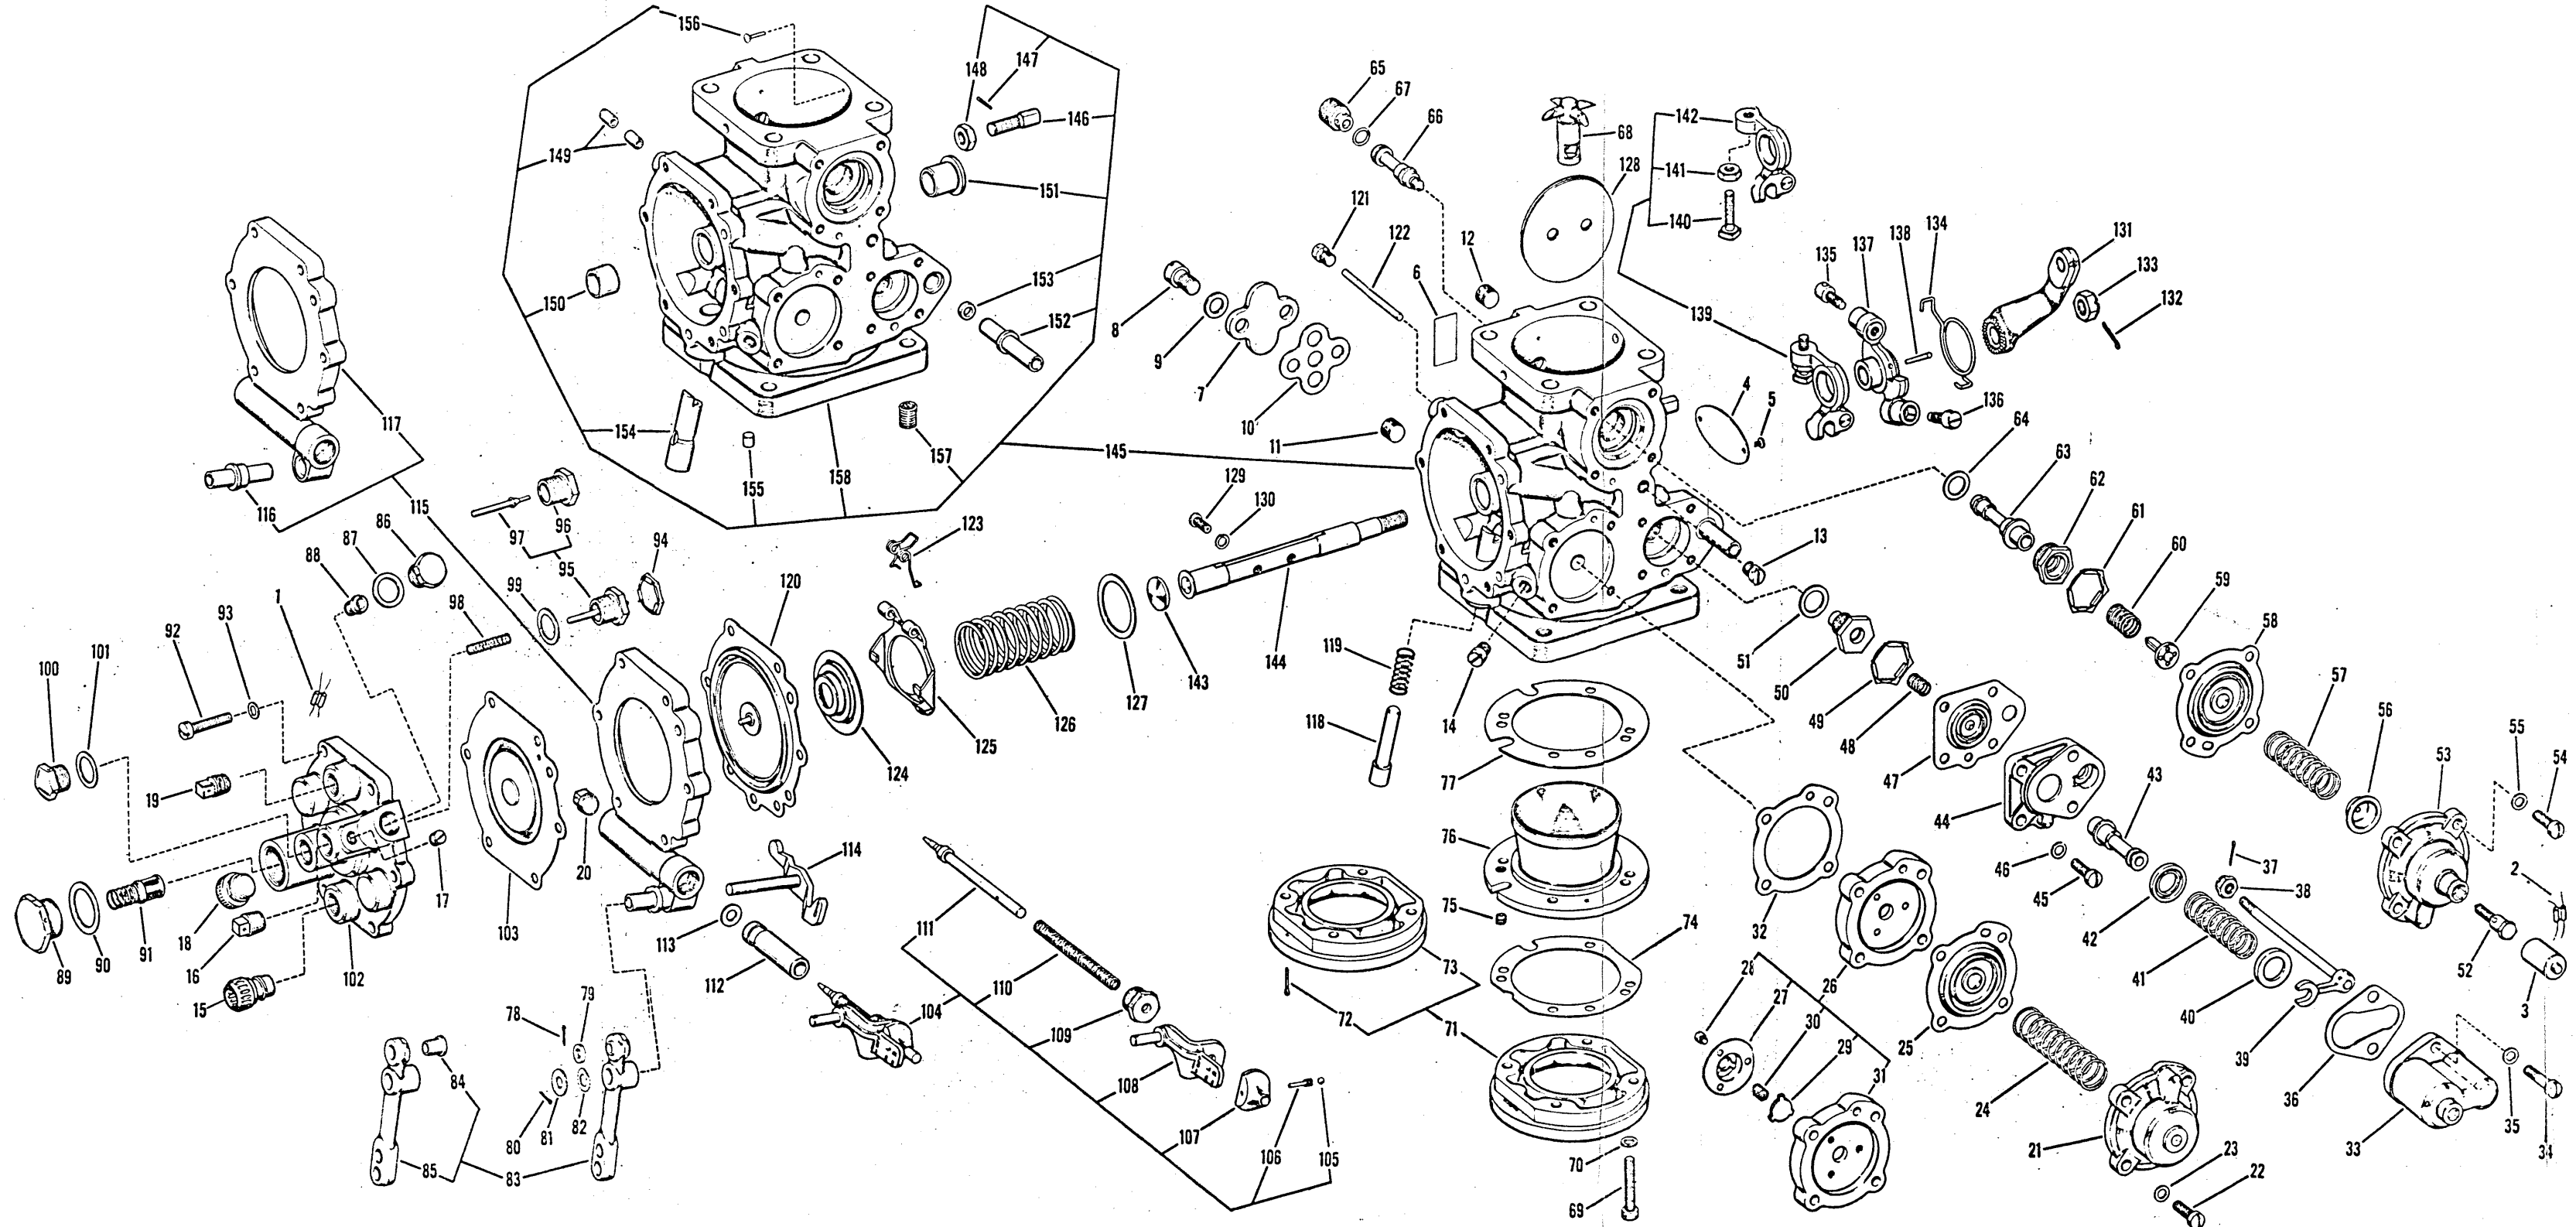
Exploded View of Model PS-5C Injection Carburetor
